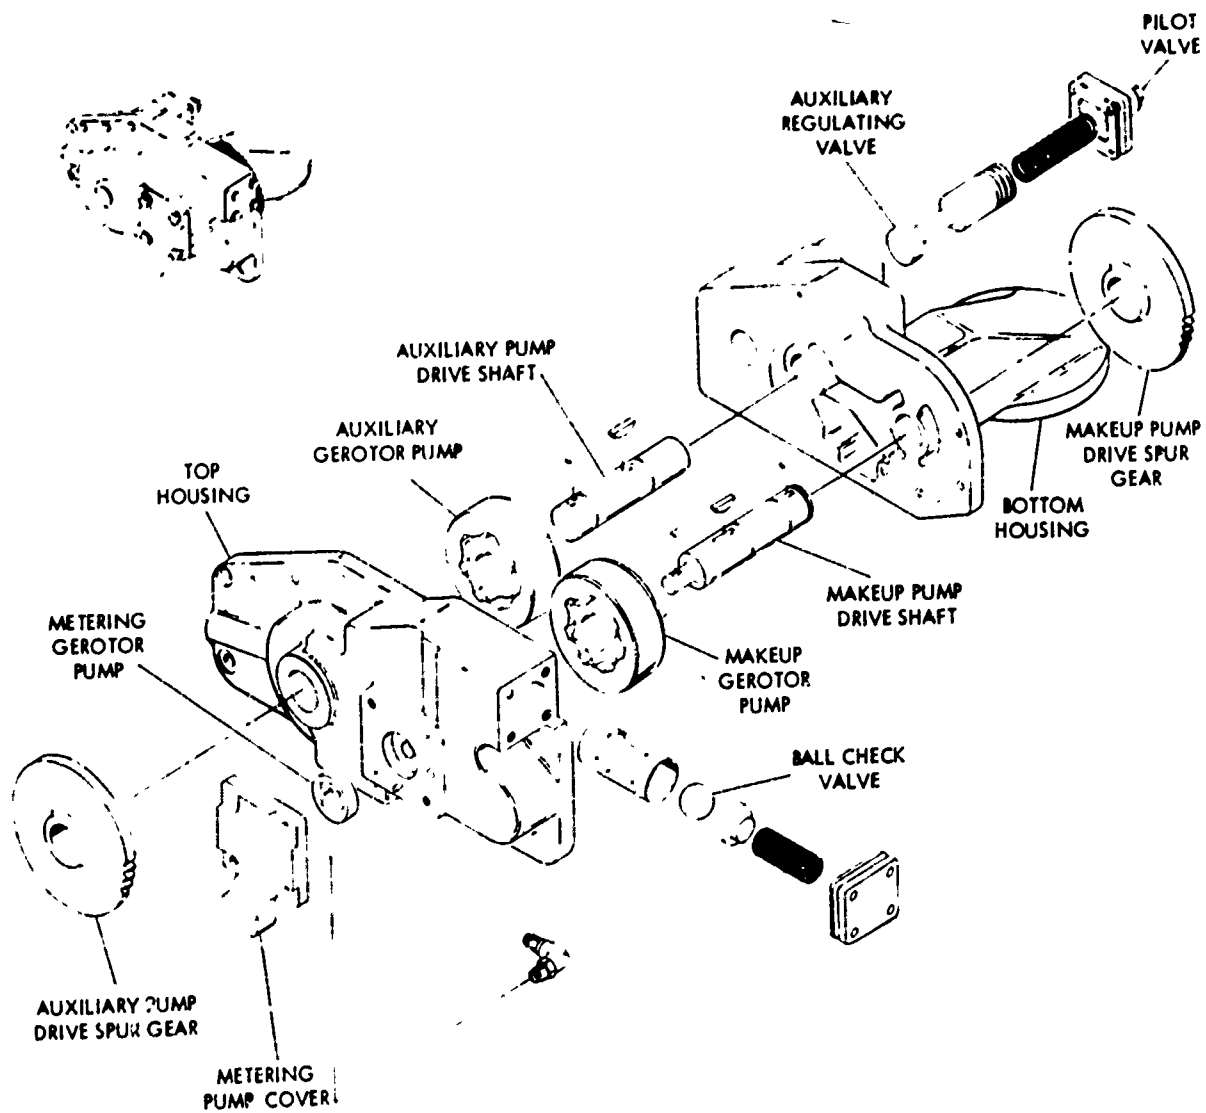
Make-up and Auxiliary Pump Assembly (exploded view)
